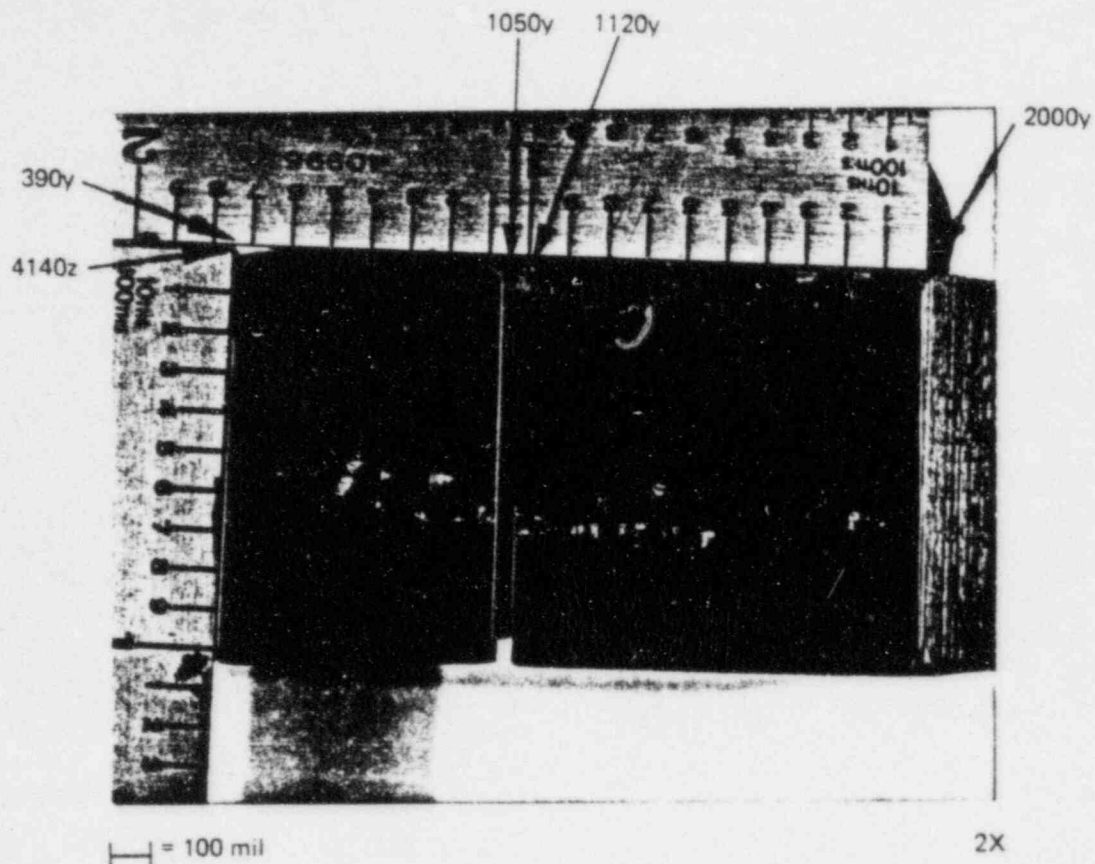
BUTT-WELDED CARBON STEEL PLATE -
